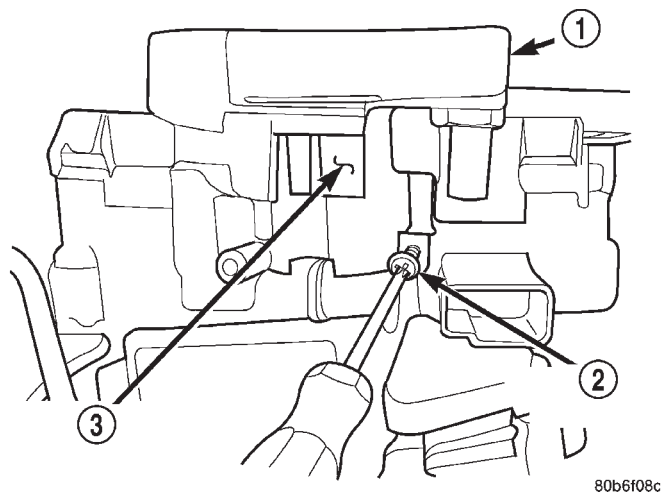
Multi-Function Switch Mounting Housing Screw Remove/Install
